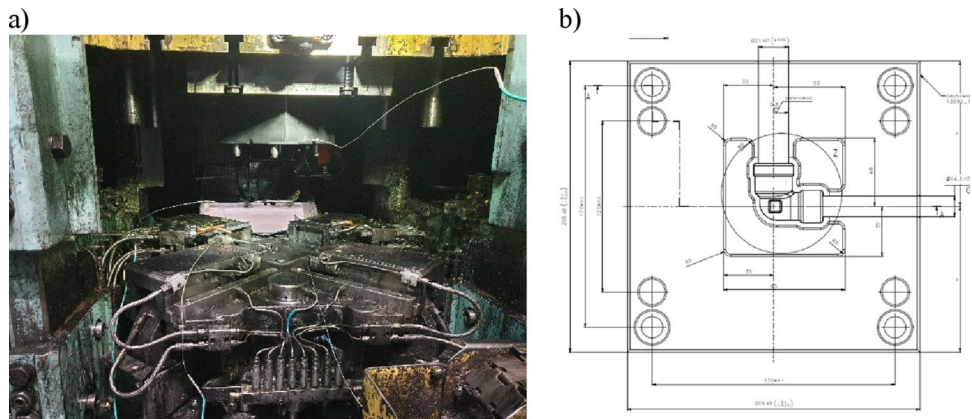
a Tools mounted on the press with thermocouples, b drawing of the lower die
